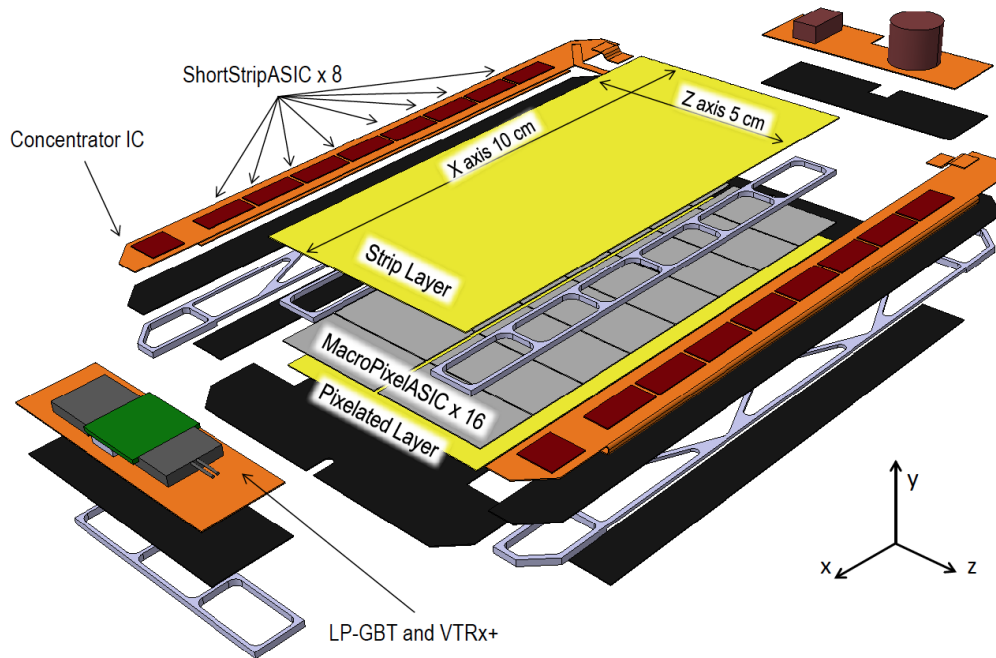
Exploded view of the current PS module baseline [CMK<sup>+</sup>14].
